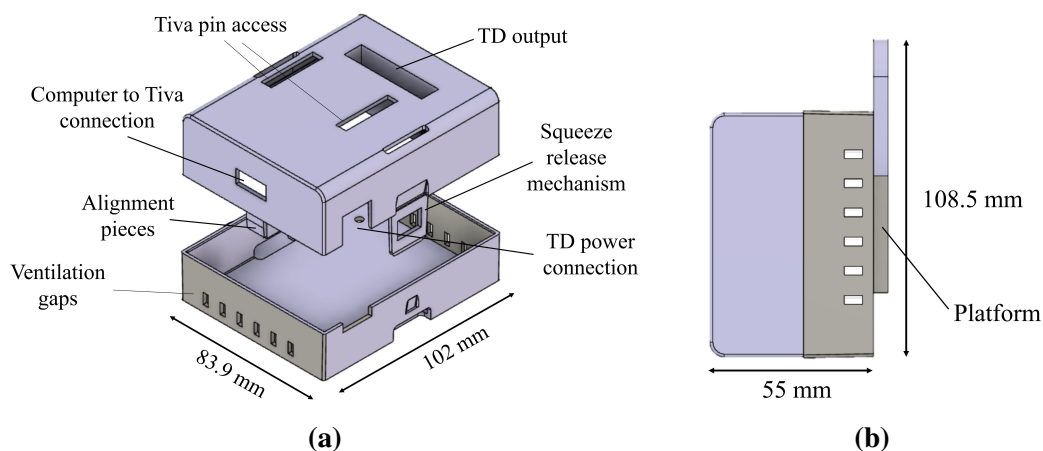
The Test Device casing design with dimensions and access points for the Test Device components labeled. (a) Exploded view. (b) Side view.
